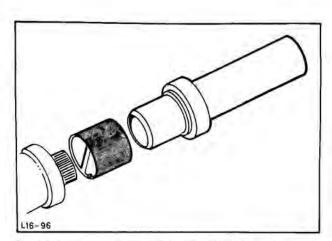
Fit extension housing bush with Special Tool No. 16-016
